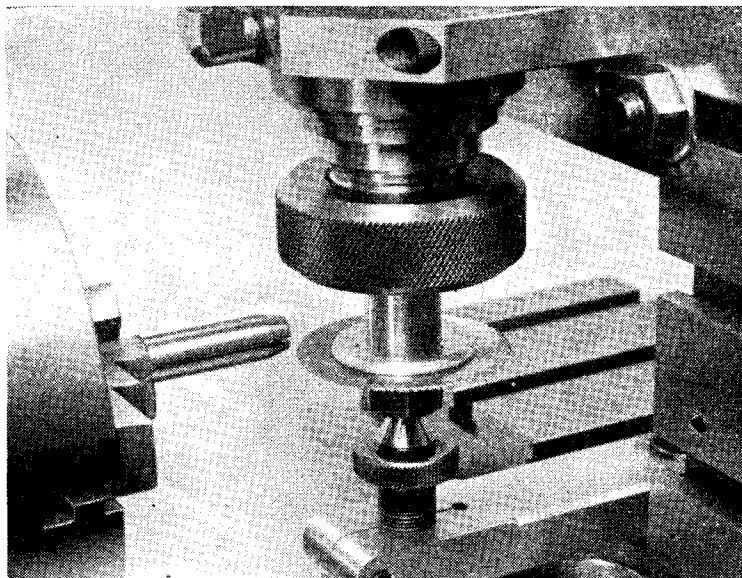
Slitting the collet with a saw mounted in the lathe milling attachment
